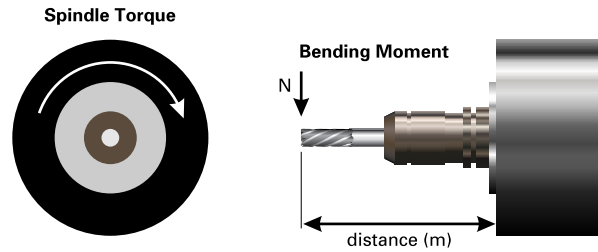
Front and Side view of Torque and Tool-Bending Moment on a Spindle
